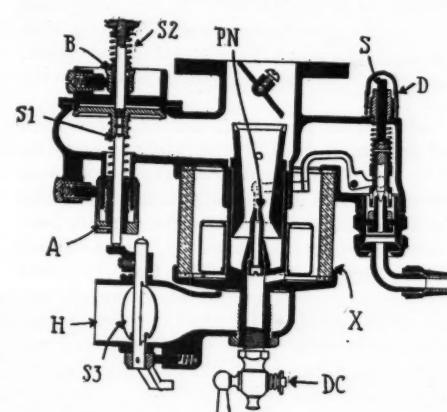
Sectional view of Stromberg carburetor, with adjustments indicated
